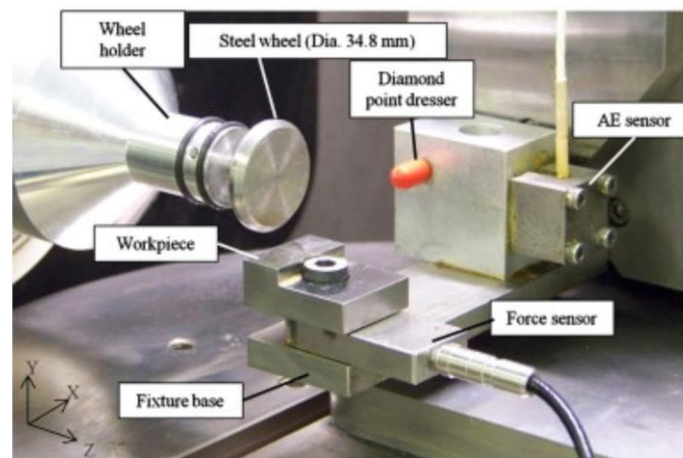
Setup of Nanoform250 Ultra machining center [61]
